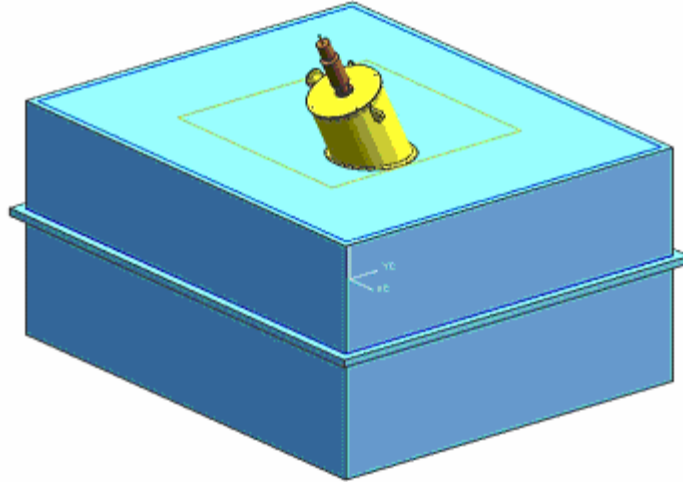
Assembly of Bushing and Turret with Tank body
